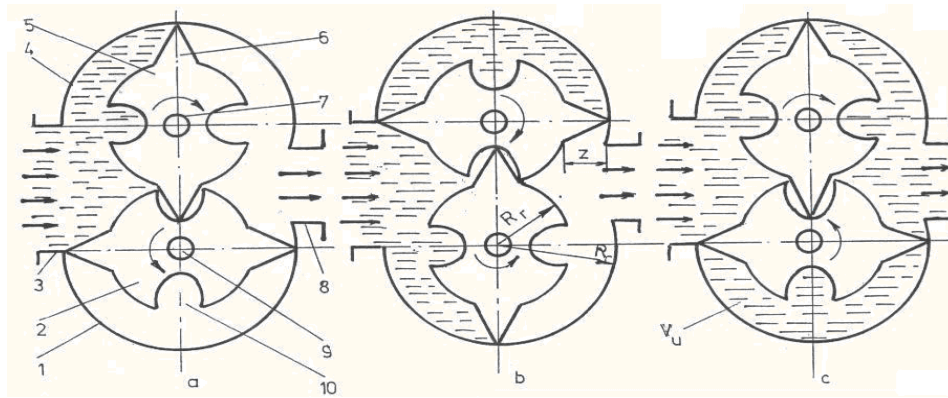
The functioning principle of the rotating volumetric machine. 1-lower casing ; 2-lower rotor; 3-intake chamber; 4-upper casing; 5-upper rotor ;6-rotating piston; 7-driven shaft; 8-discharge chamber; 9-driving shaft ; 10-cavity where the piston of the upper rotor enters
